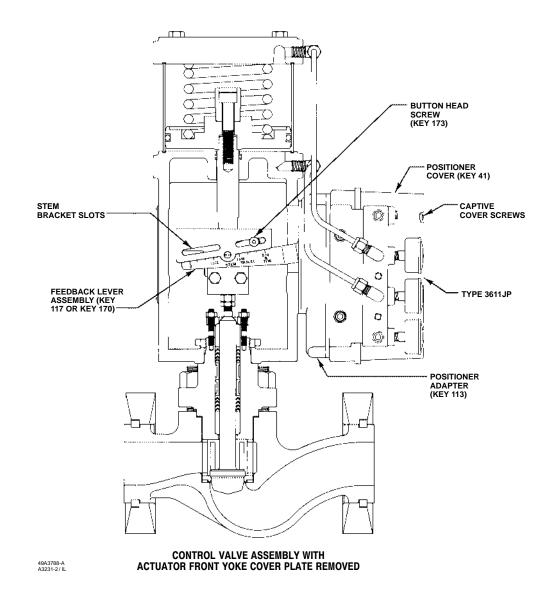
Typical Mounting Details for Type 3611JP and 3621JP Positioners on 585 Series Actuators
